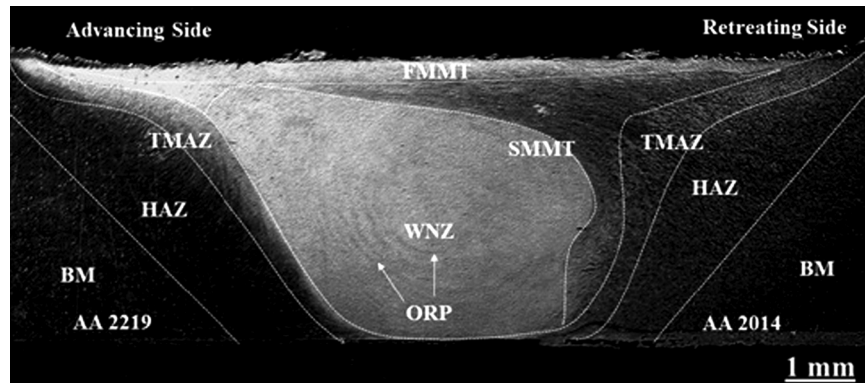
Macrostructure of AA2219-AA2014 weld.
